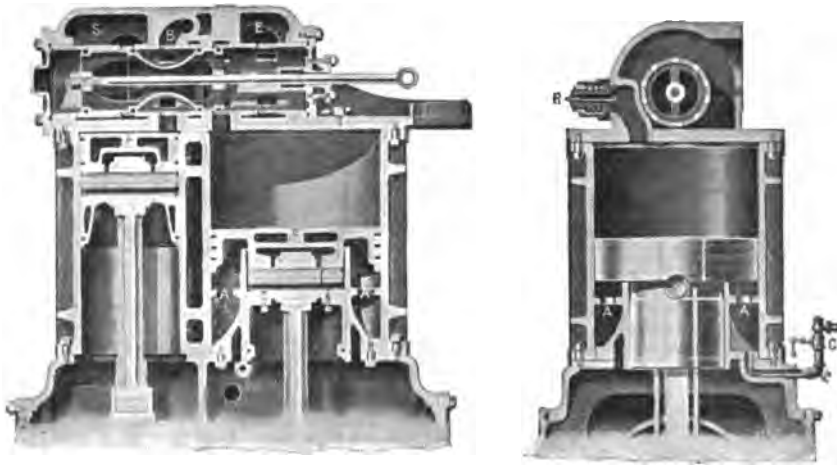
Detail of Cylinders, Pistons, Steam Chest, and Valve of Westinghouse Compound Engine
